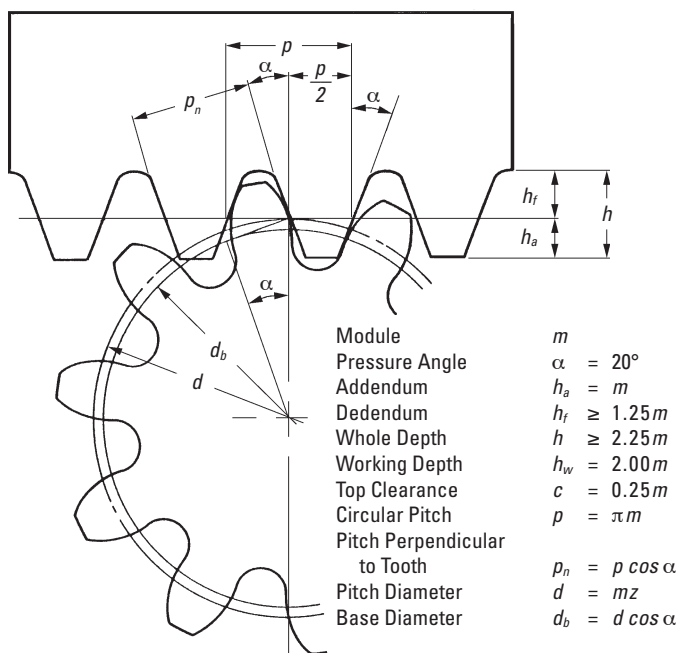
The Tooth Profile and Dimension of Standard Rack
